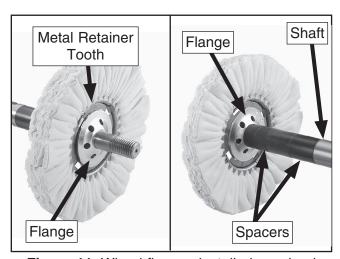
Wheel flanges installed on wheel (outside and inside views shown for clarity).
